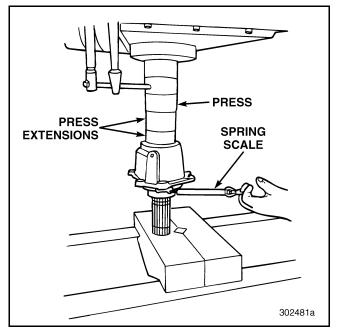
Setup for Bearing Preload Adjustment Using Collapsible Spacer
